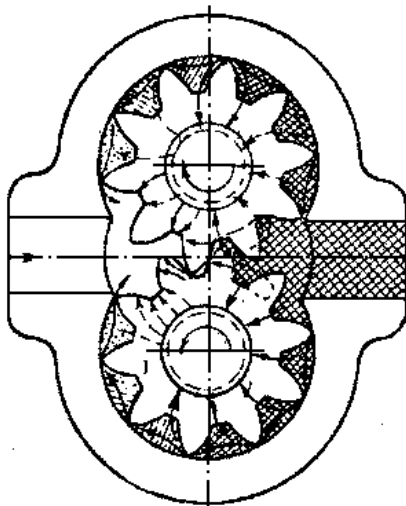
Leakage direction in the clearances of the gear pump
